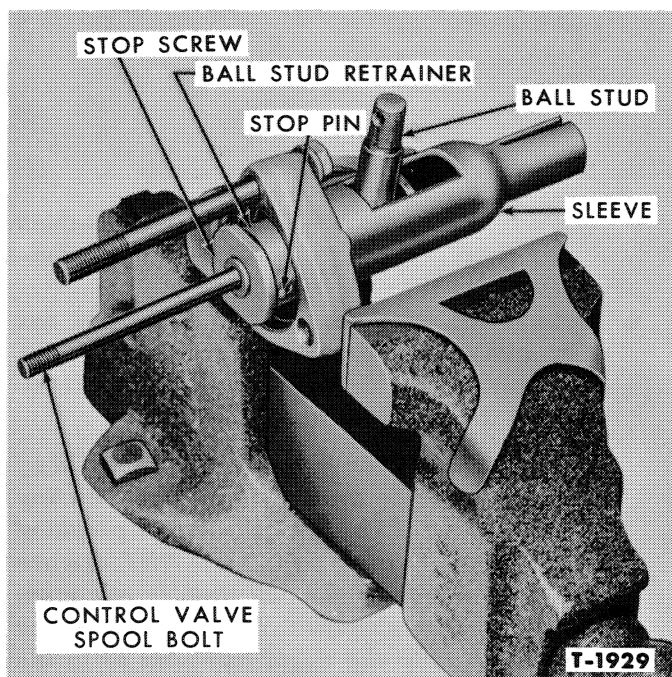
Sleeve and Flange Assembly with Control Valve Removed
